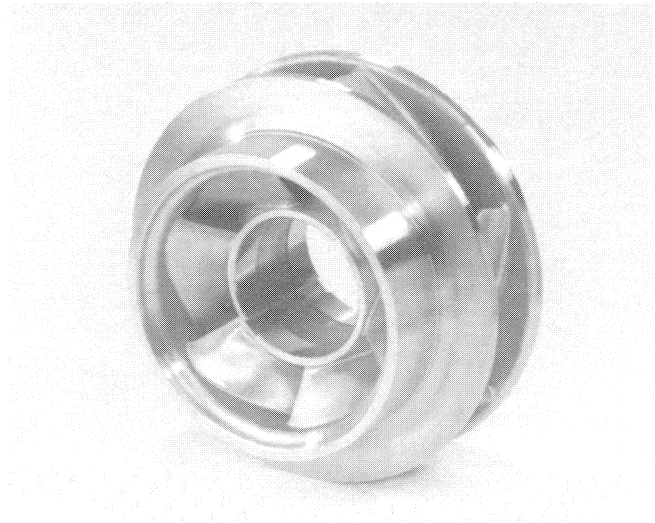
Finished Double-Entry Impeller Manufactured from a Forged Blank.
